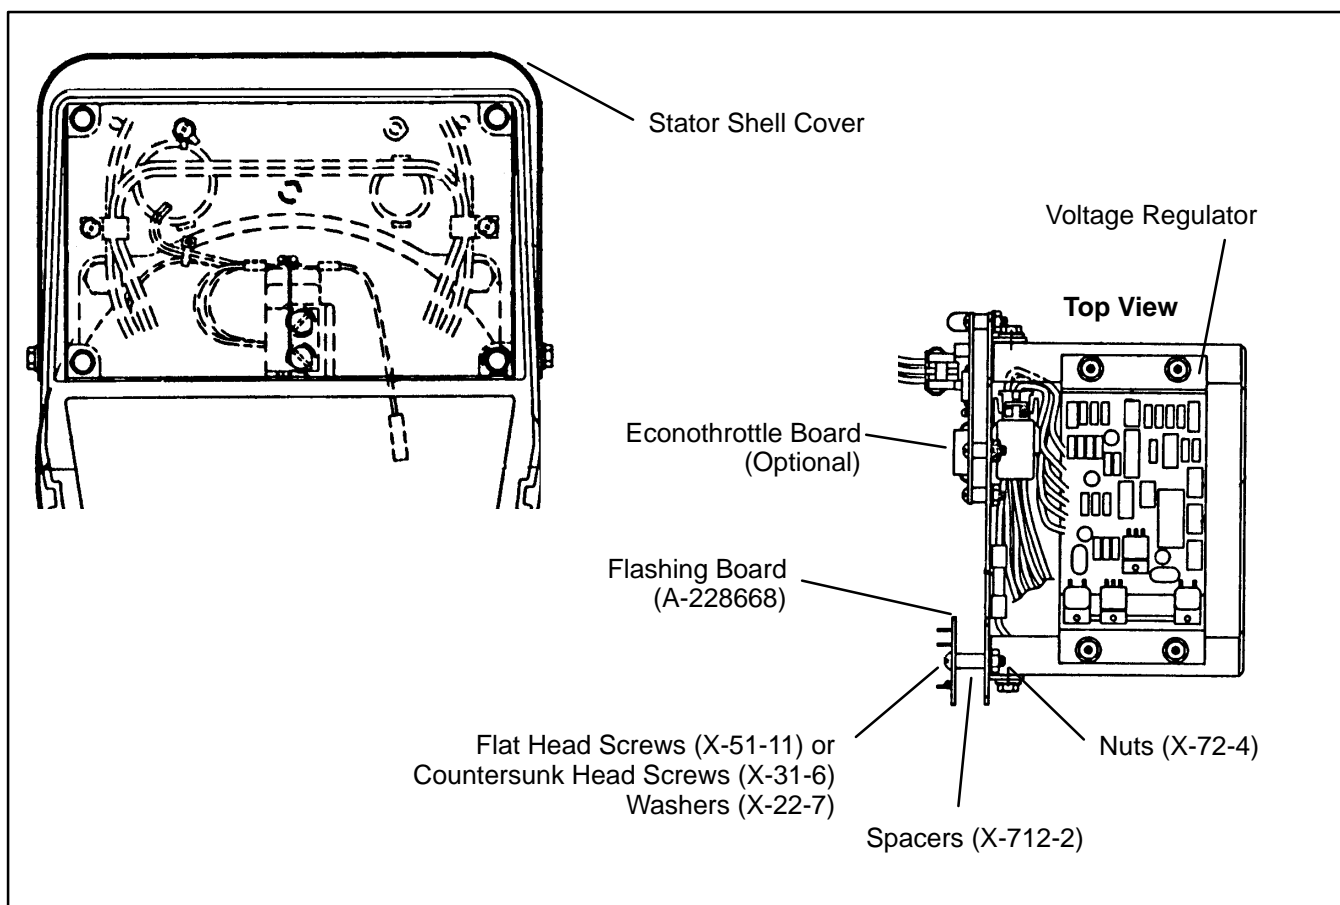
Flashing Board Location When Mounted Underneath Stator Shell Cover.
